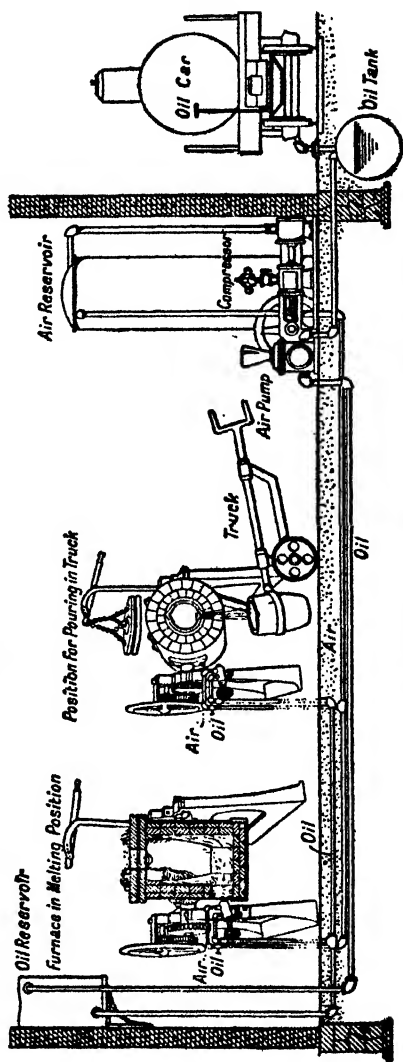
Steele-Harvey metal-melting furnace, showing arrangement of oil and air pipes.
